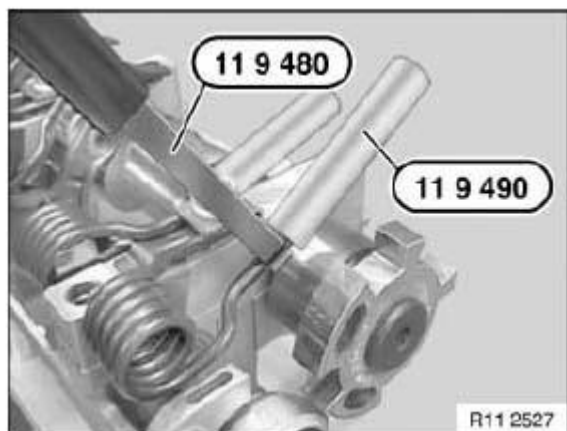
Identifying Special Tool (11 9 480) And (11 9 490)
